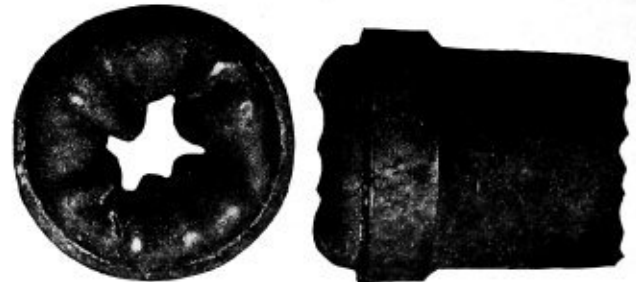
Bottom Section of 10-Inch Oil Well Casing After Crushing
